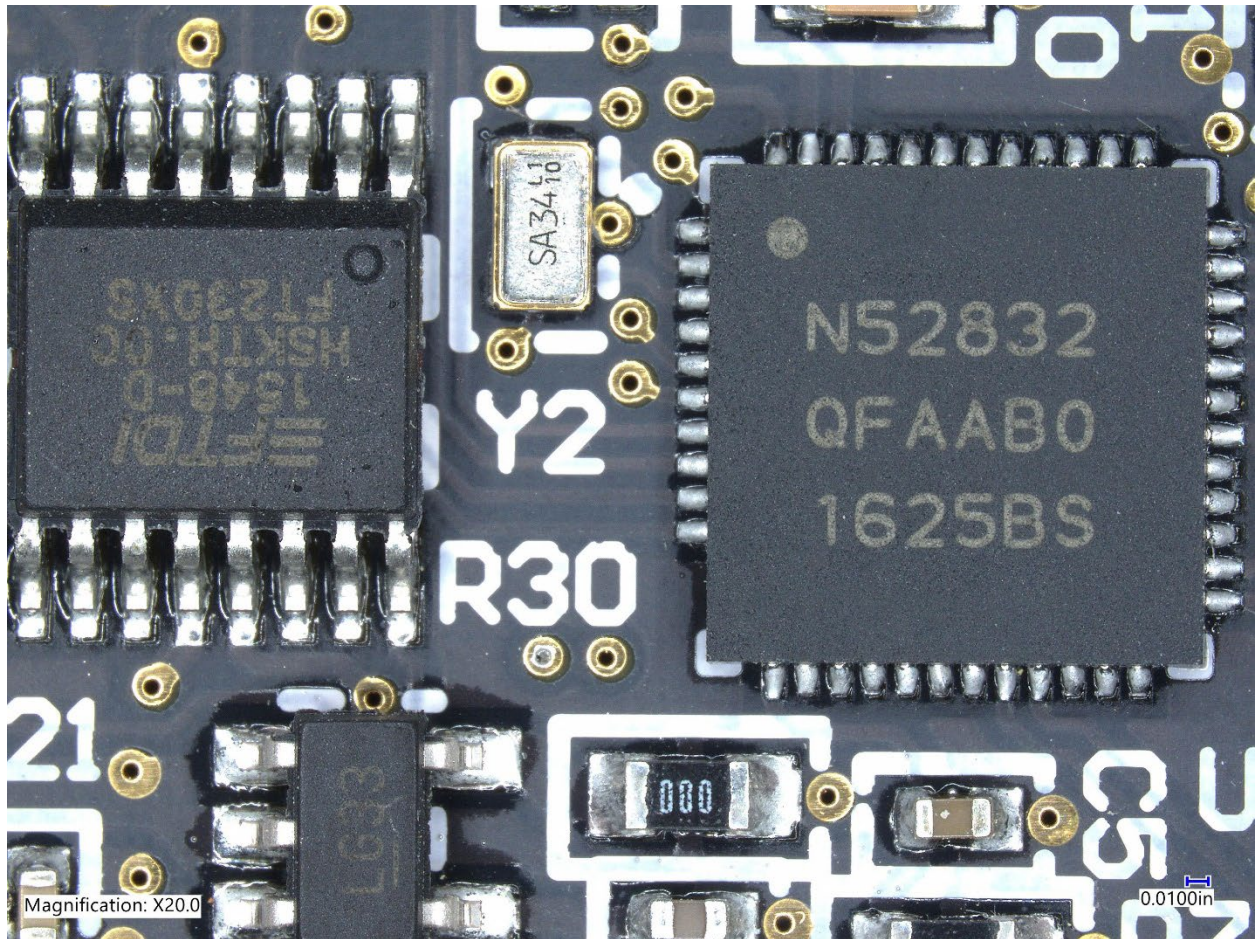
BLE Telemetry Test Module – Shield Removed Closeup
